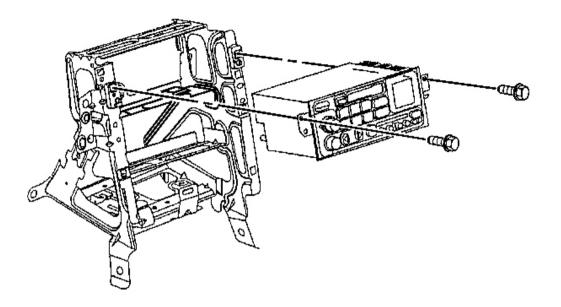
Radio Control & Center Bracket Courtesy of GENERAL MOTORS CORP.
